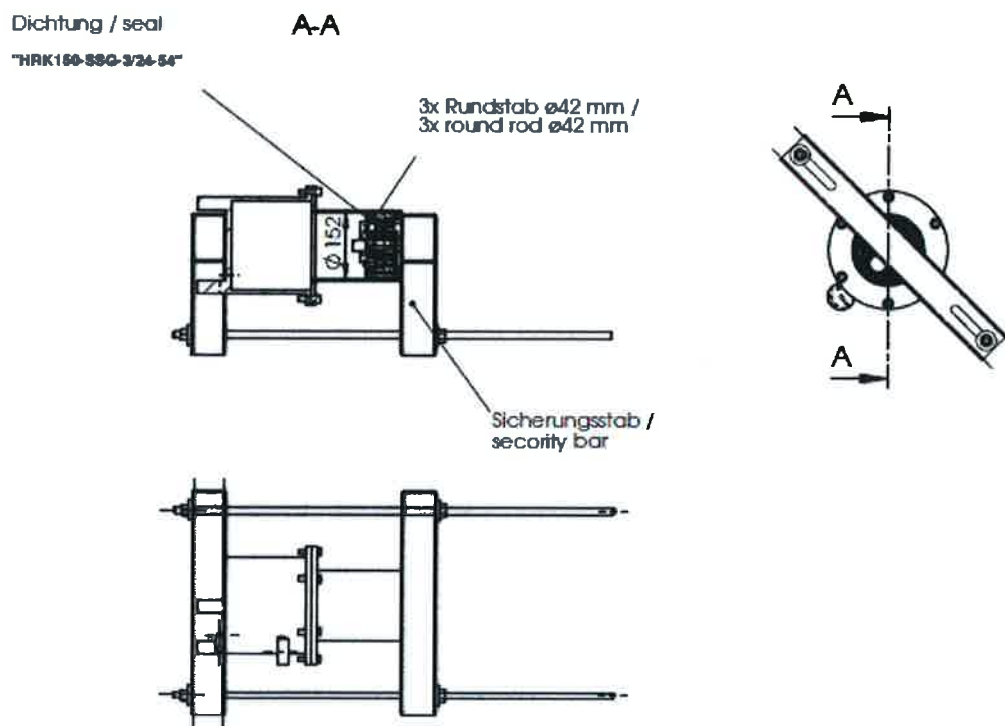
View and cross-section of the test setup with HRK150-SSG-3/24-54 - manufacturer`s drawing.
